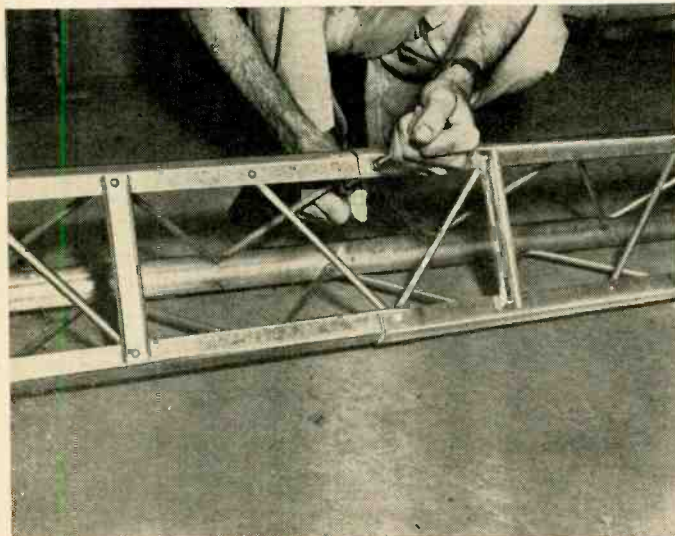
Two sections of steel tower being assembled in shop—expanded ends of one section fit over straight ends of other.
